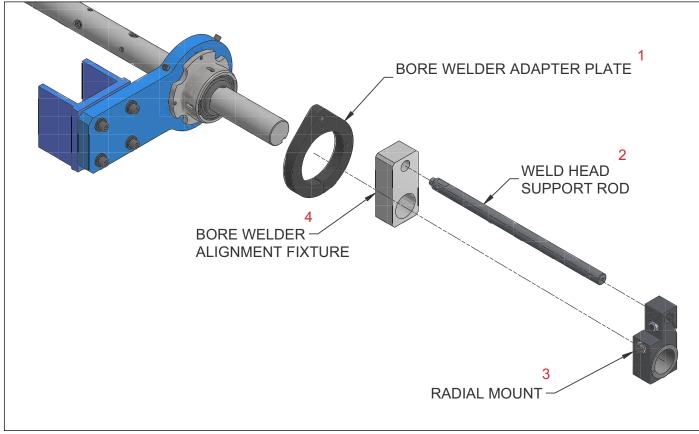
DETAIL OF INSTALLING THE BORING BAR ADAPTER KIT
